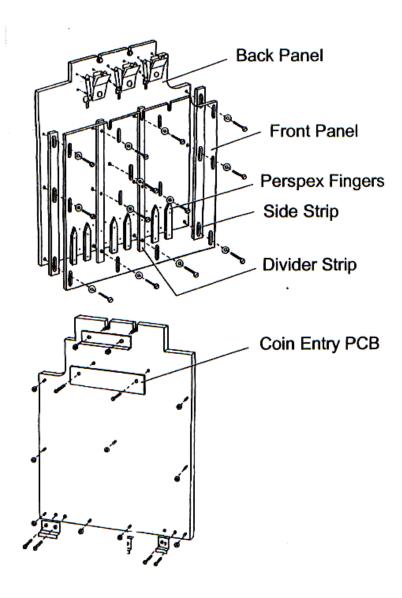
"Non-Feature" type Pin Perspex Assembly
